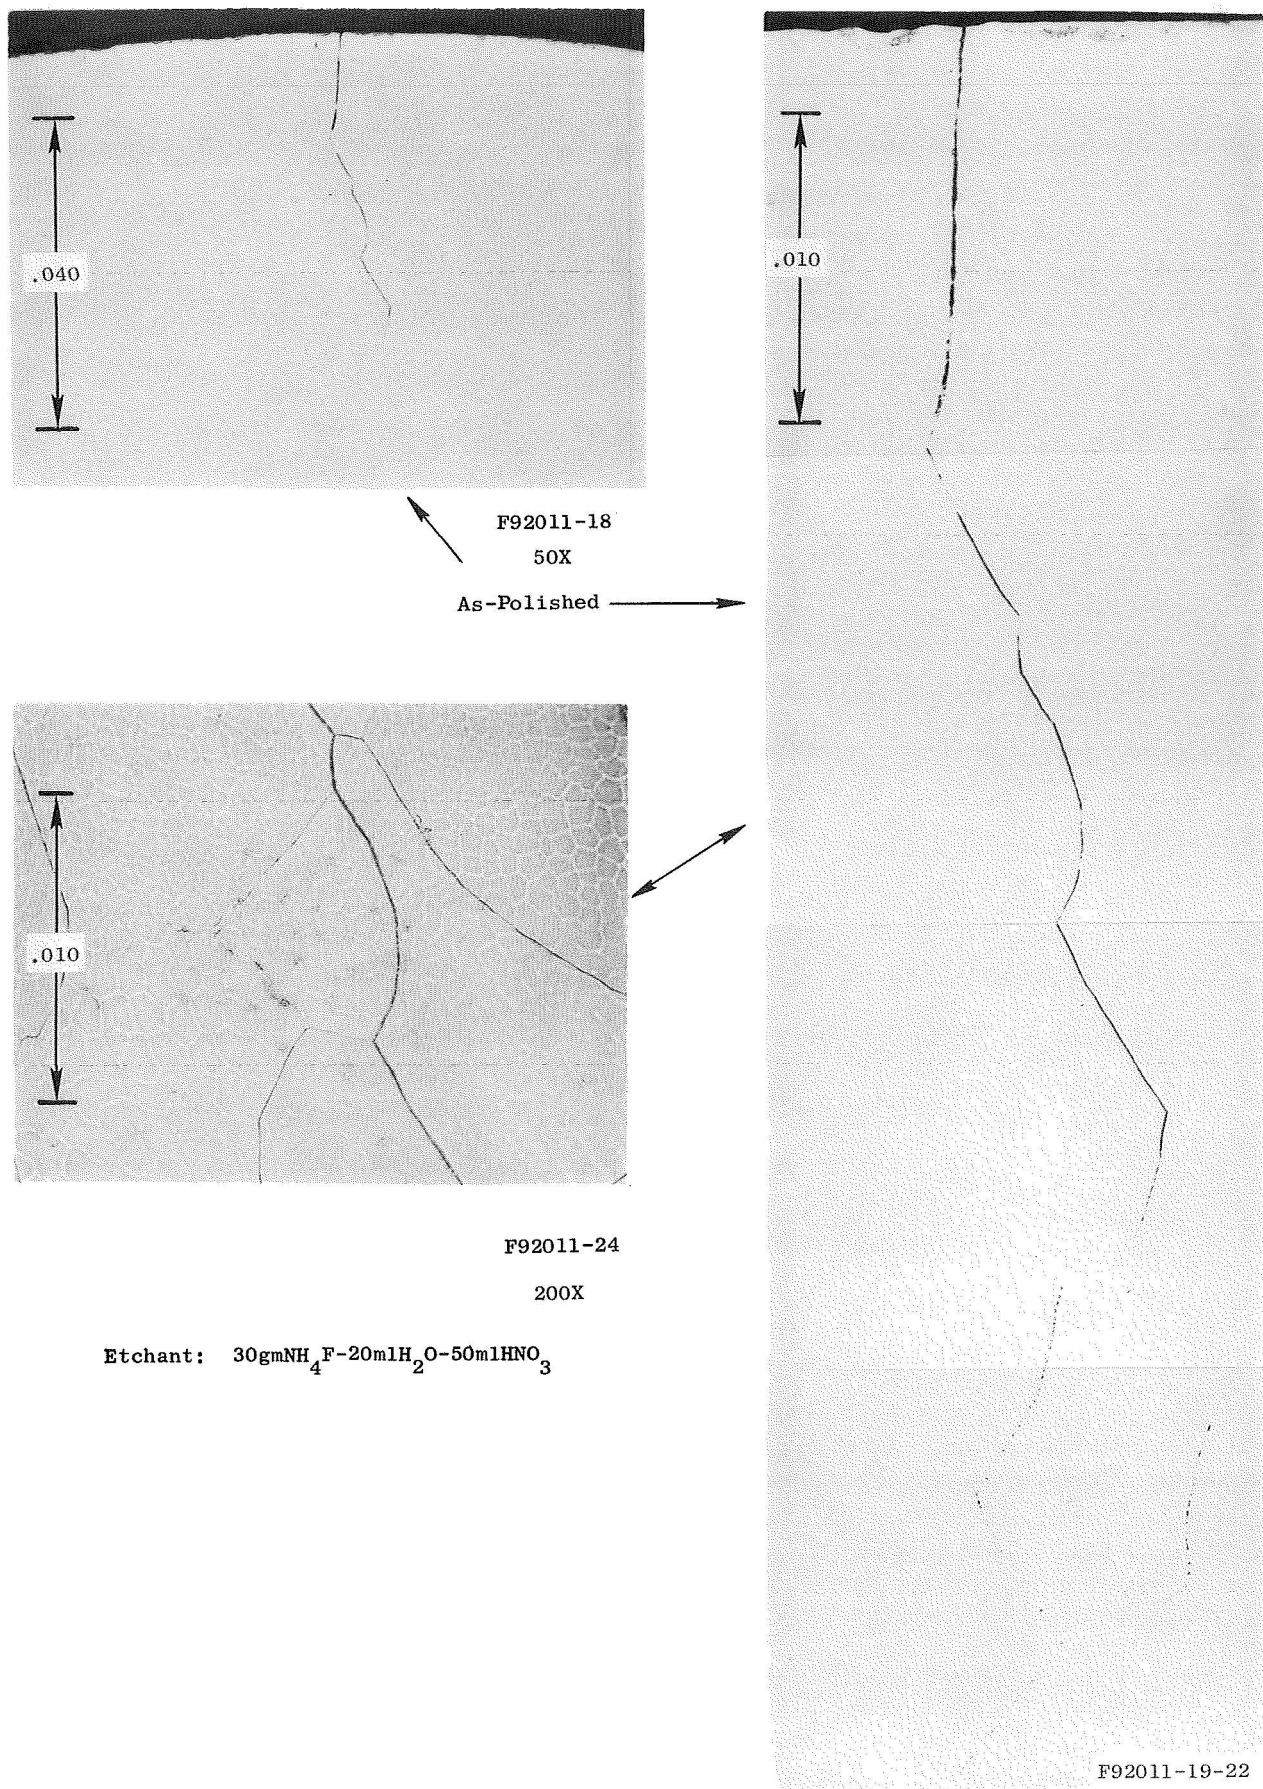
Intergranular Crack in the Weld Nugget of the 0.375-Inch Diameter T-111 Boiler Tube Removed From the T-111 Rankine System Corrosion Test Loop.
